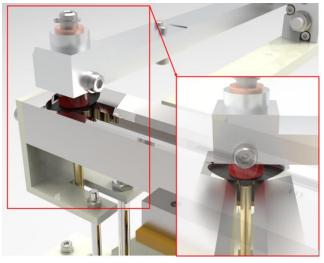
The inner tube valve transfer unit picturing the proper position of the inner tube valve inside the positioning tool.
